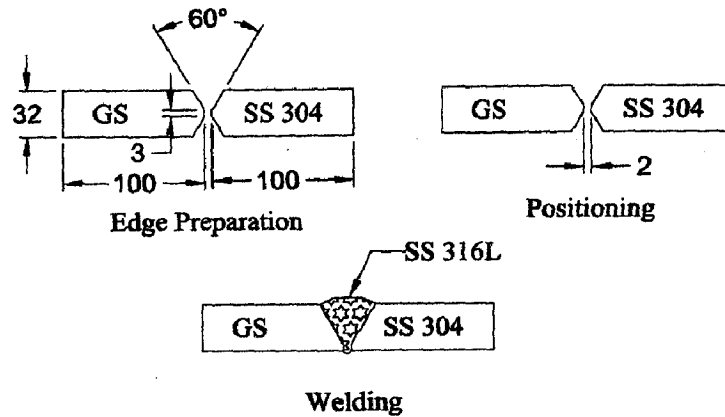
Welding Steps for SAW process of SS304 and German steel
